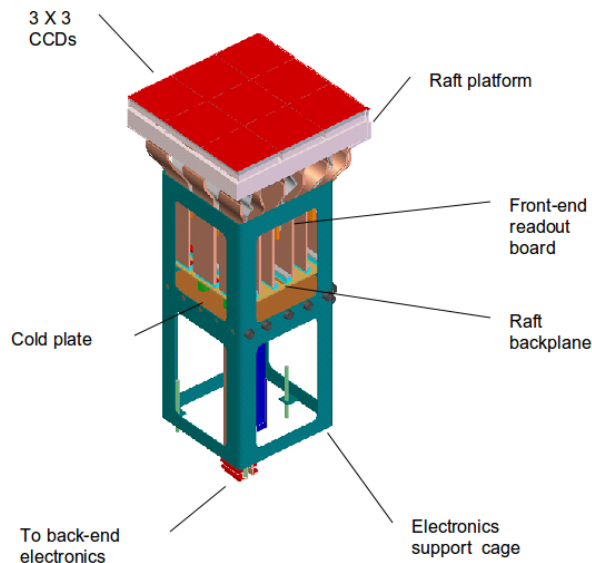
The figure shows how each CCD sensor is packaged into the  $3 \times 3$  array of CCDs connected to the FEE[12].
